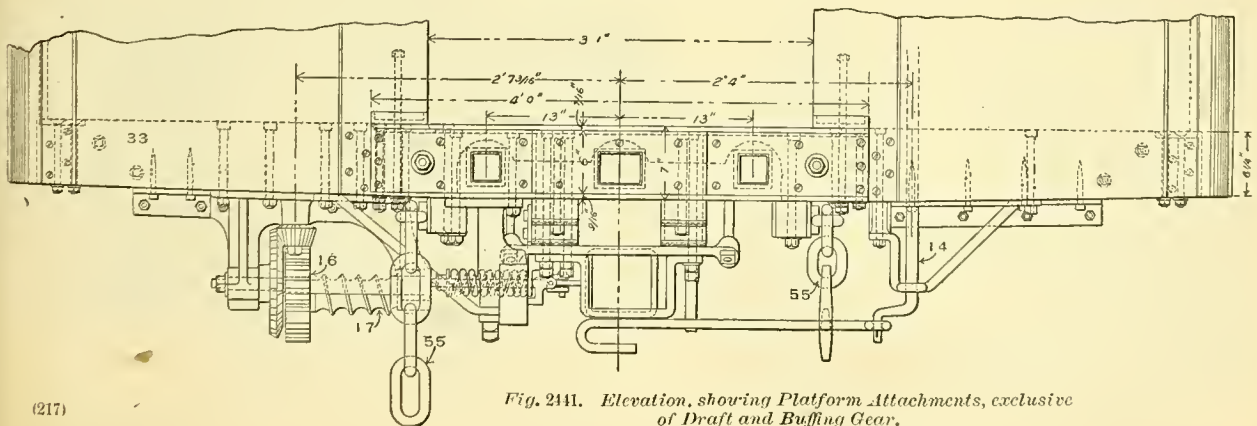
Elevation, showing Platform Attachments, exclusive of Draft and Buffing Gear.
